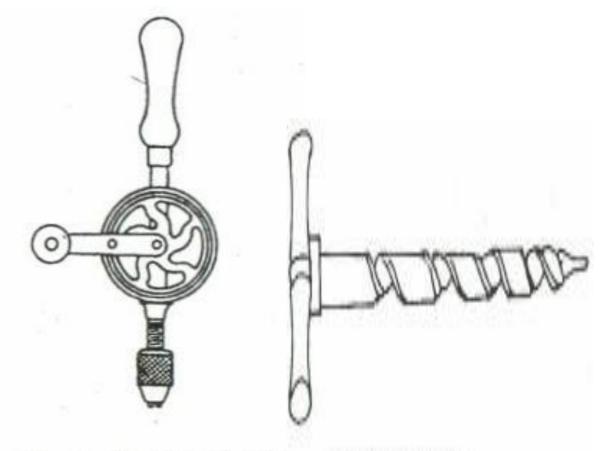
Hand drill Fig. 1.19 Gimlet
